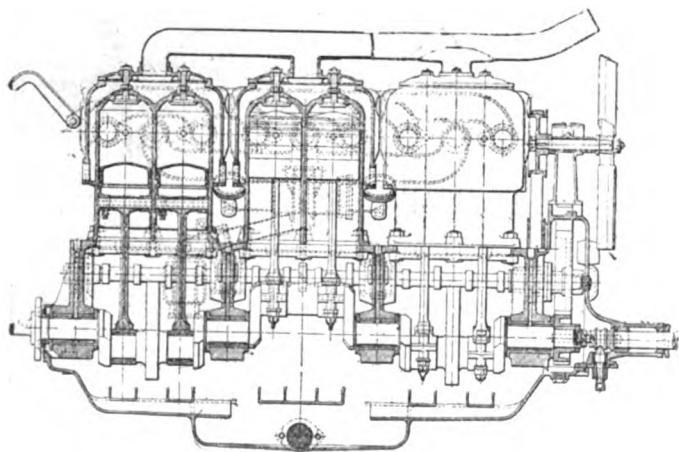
Sectional Elevation of Siddeley Six-Cylinder Engine.
